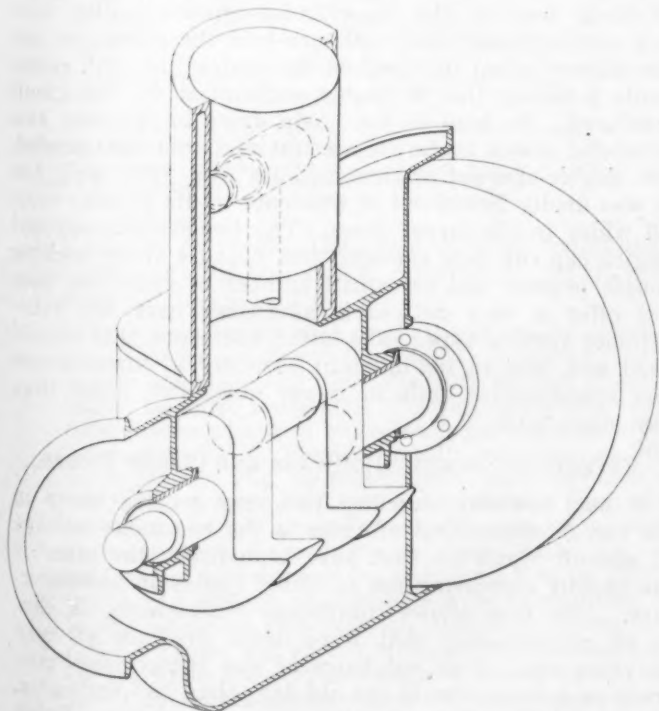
TYPICAL SINGLE-CYLINDER ENGINE
